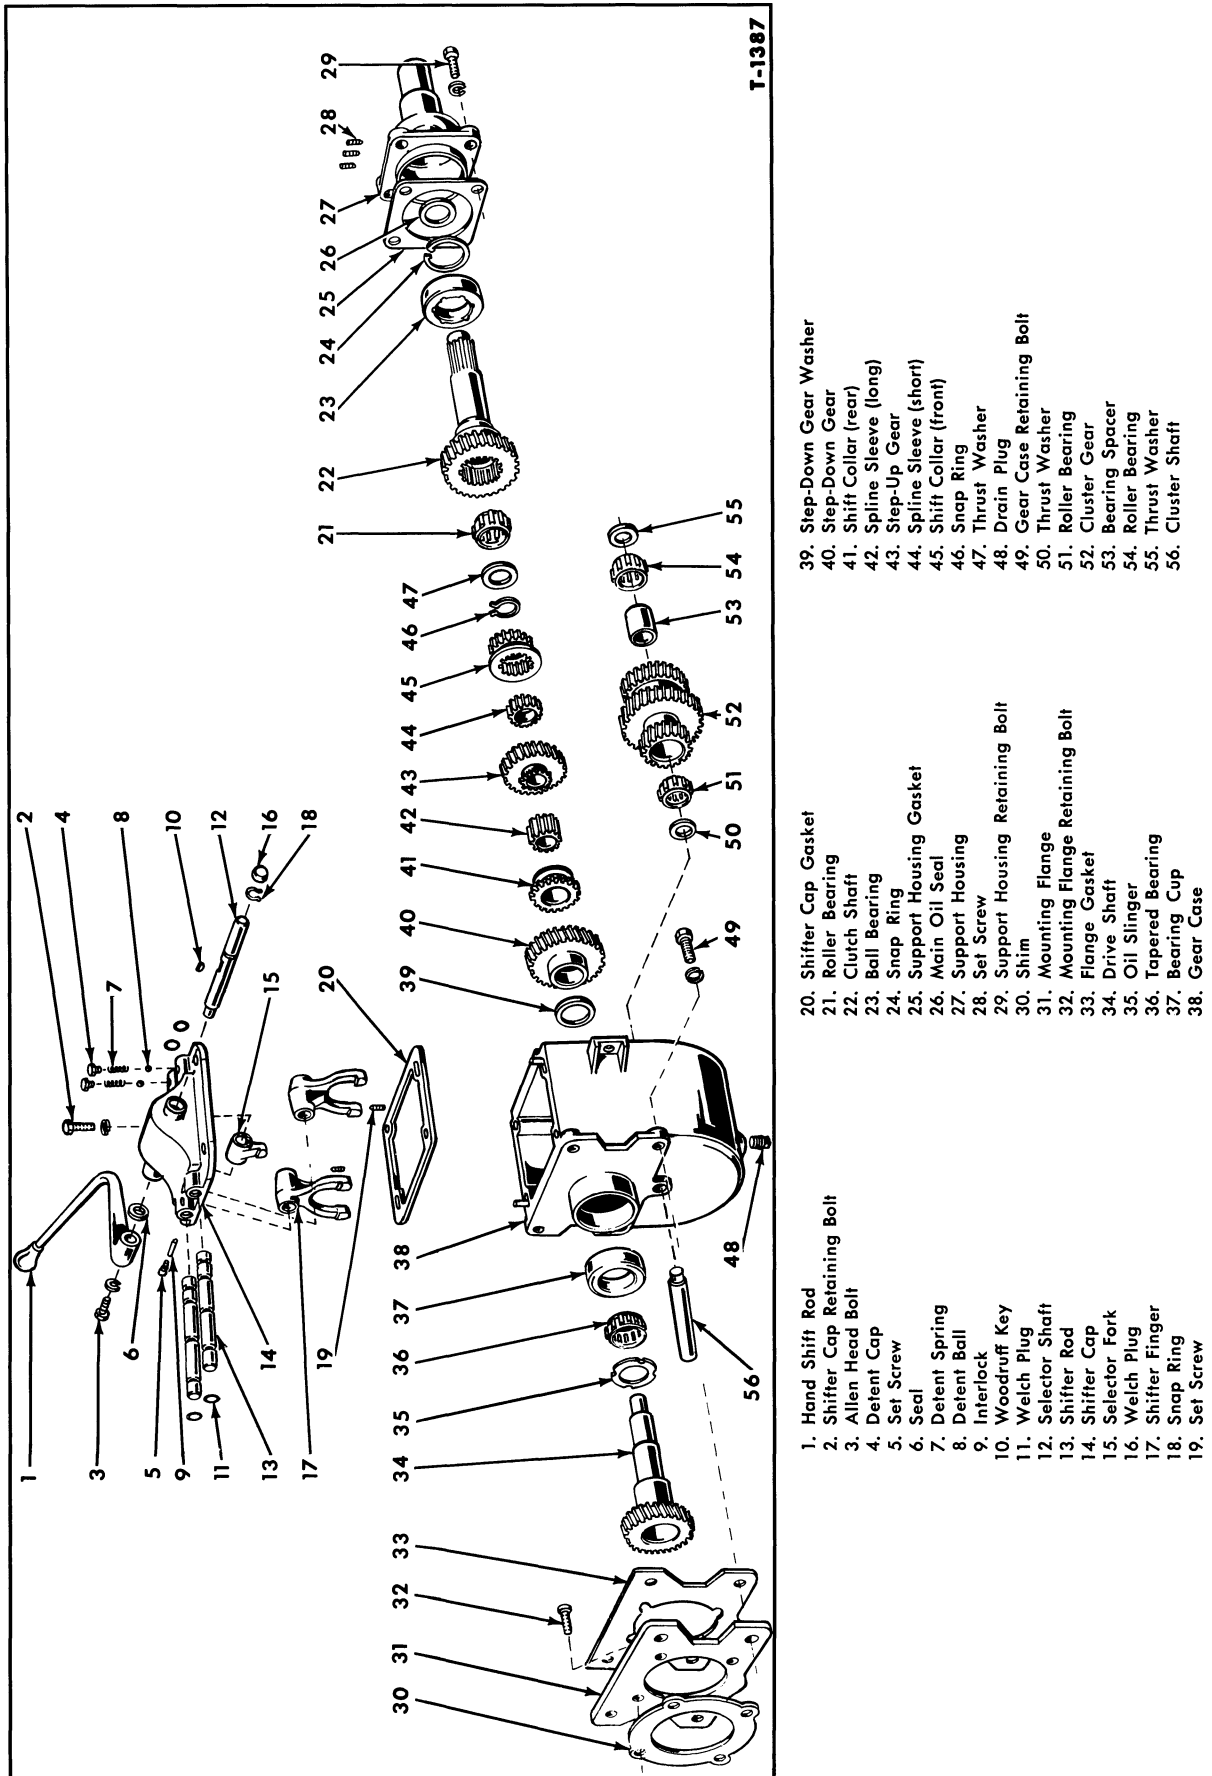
Step-Up and Step-Down Transmission—Disassembled
